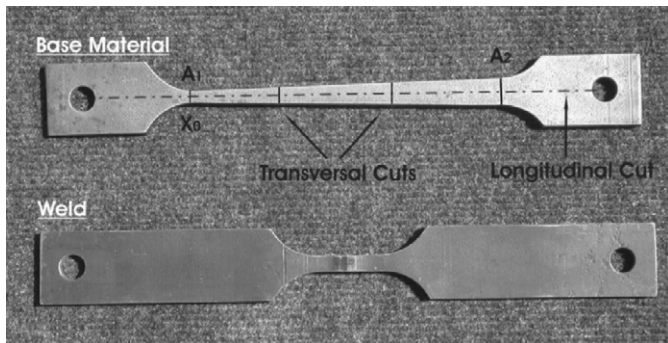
Weld and base metal specimens. Cutting process is also indicated.
